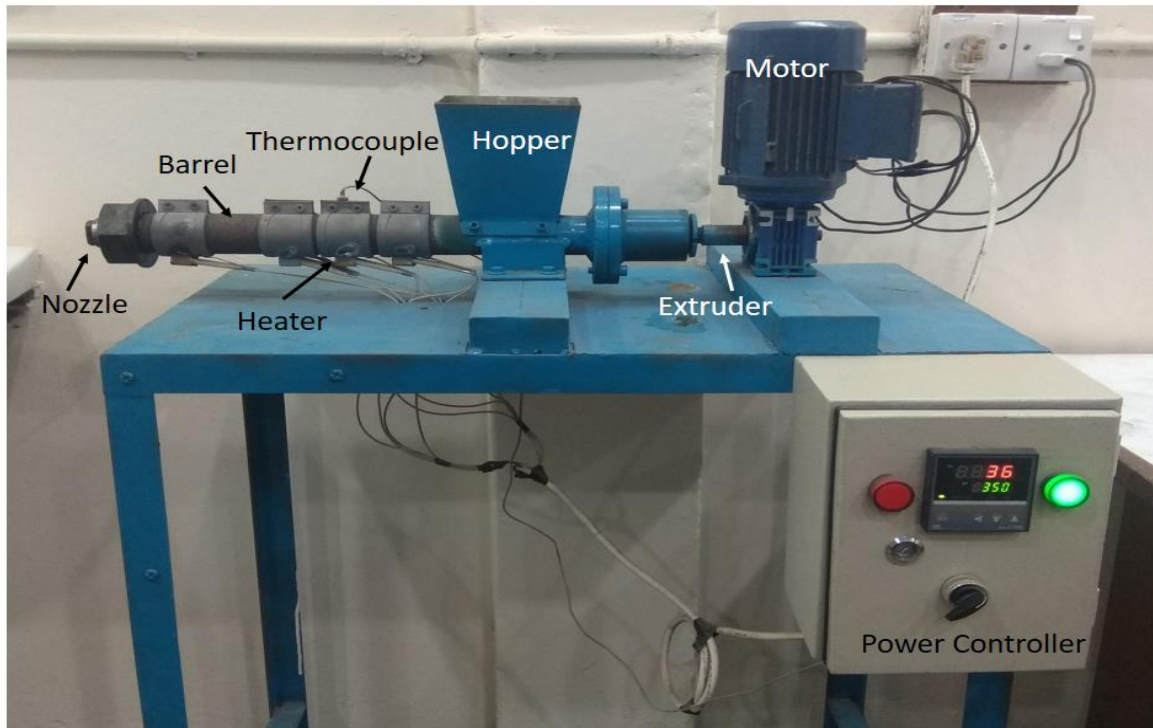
Extrusion Molding Machine (EMM) set up.
